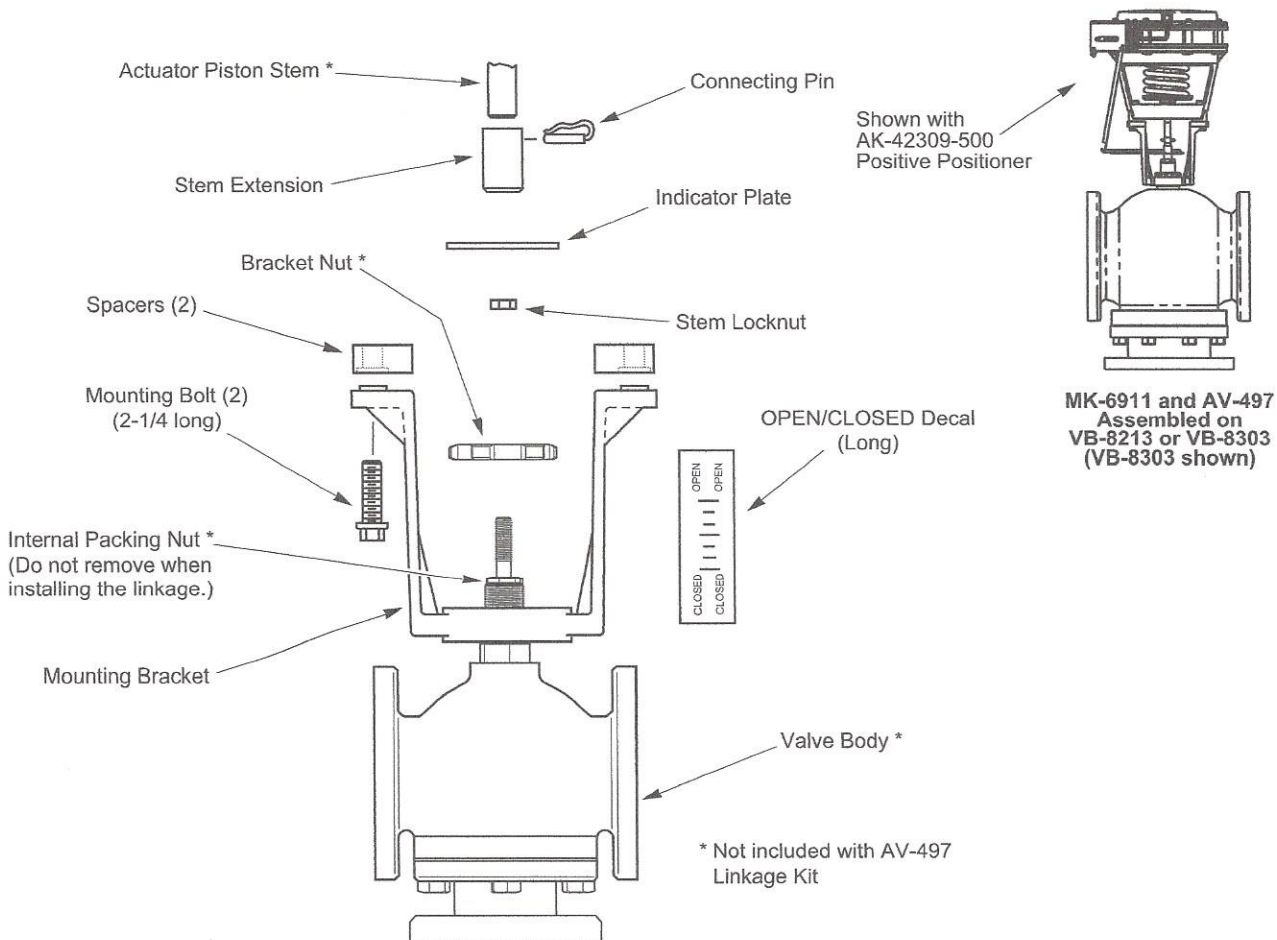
Valve Linkage Assembly for MK-6911 Actuator on 6" VB-8213 or VB-8303 Valve.
